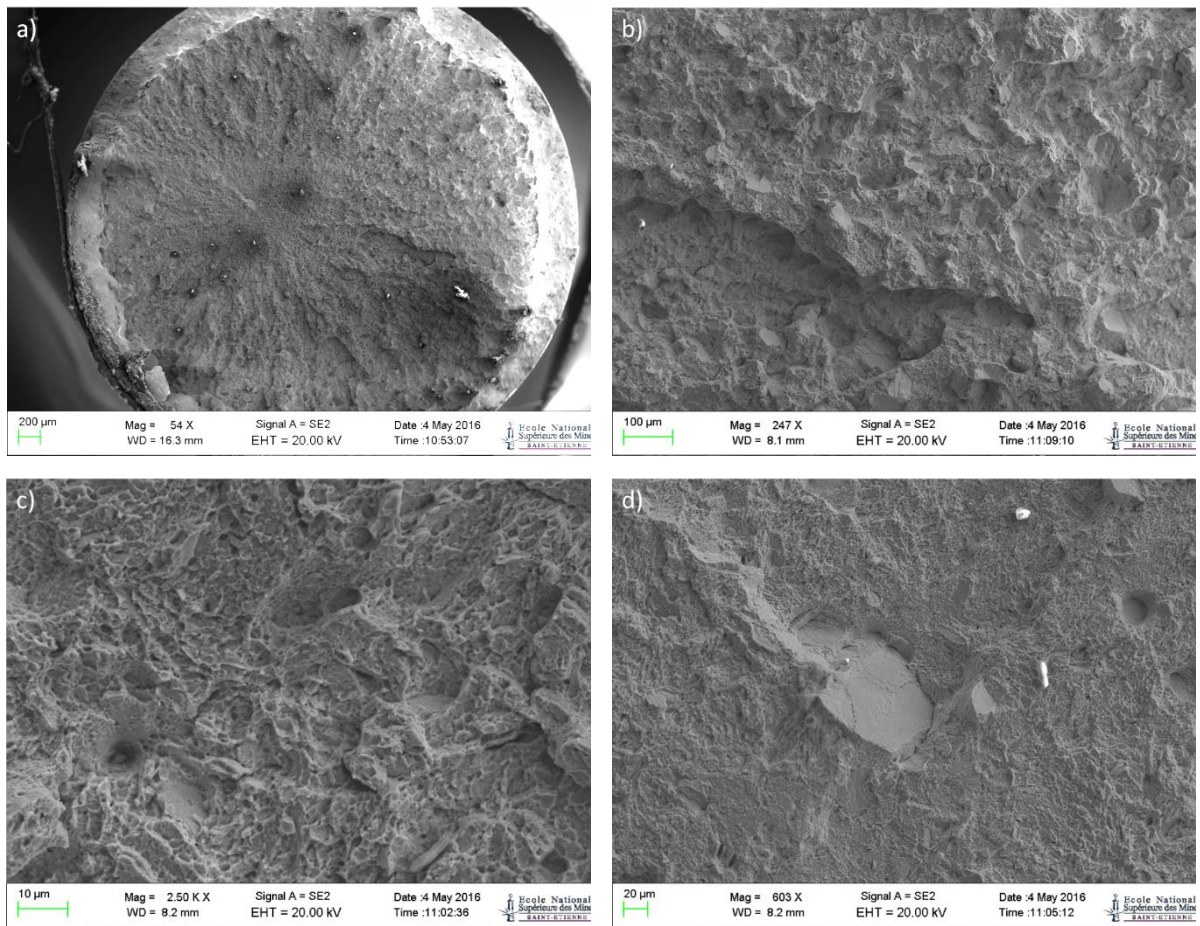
Fracture surface of the smooth tensile specimen at various magnifications.
